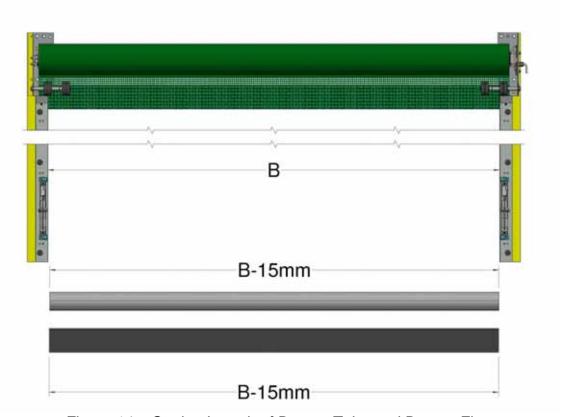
, Cutting Length of Bottom Tube and Bottom Flap
